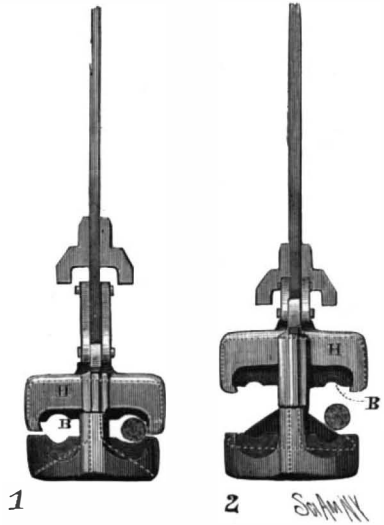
Cable released. Fig. 2.—"Tripping" the cable but held in place by hooks.
